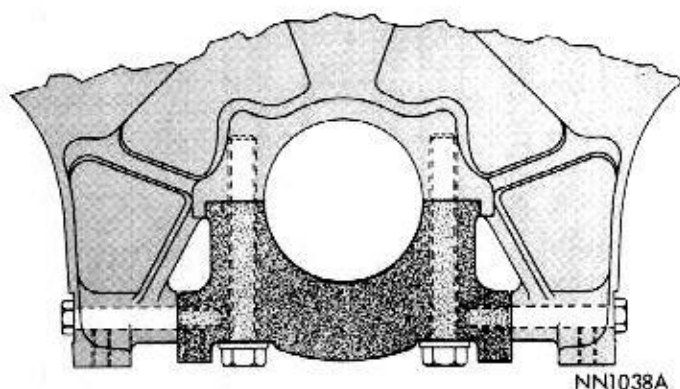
Main Bearing Cap with Horizontal Tie-Bolts
